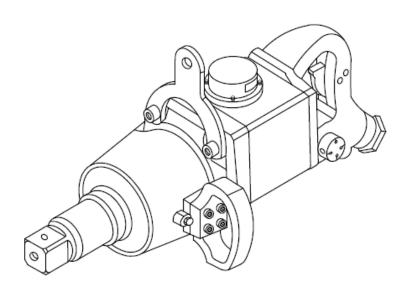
HYDRAULIC IMPULSE TOOL WITH GRIP TYPE HANDLE
